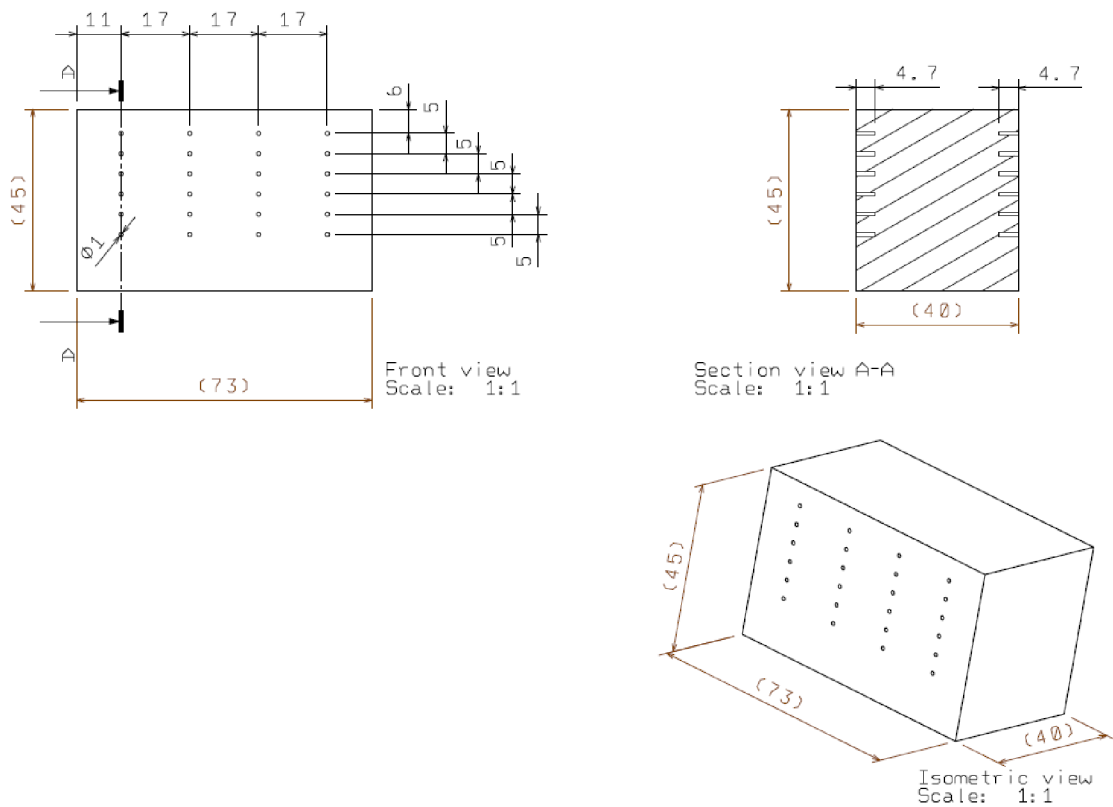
Drawing of the workpiece by CATIA V5R20
